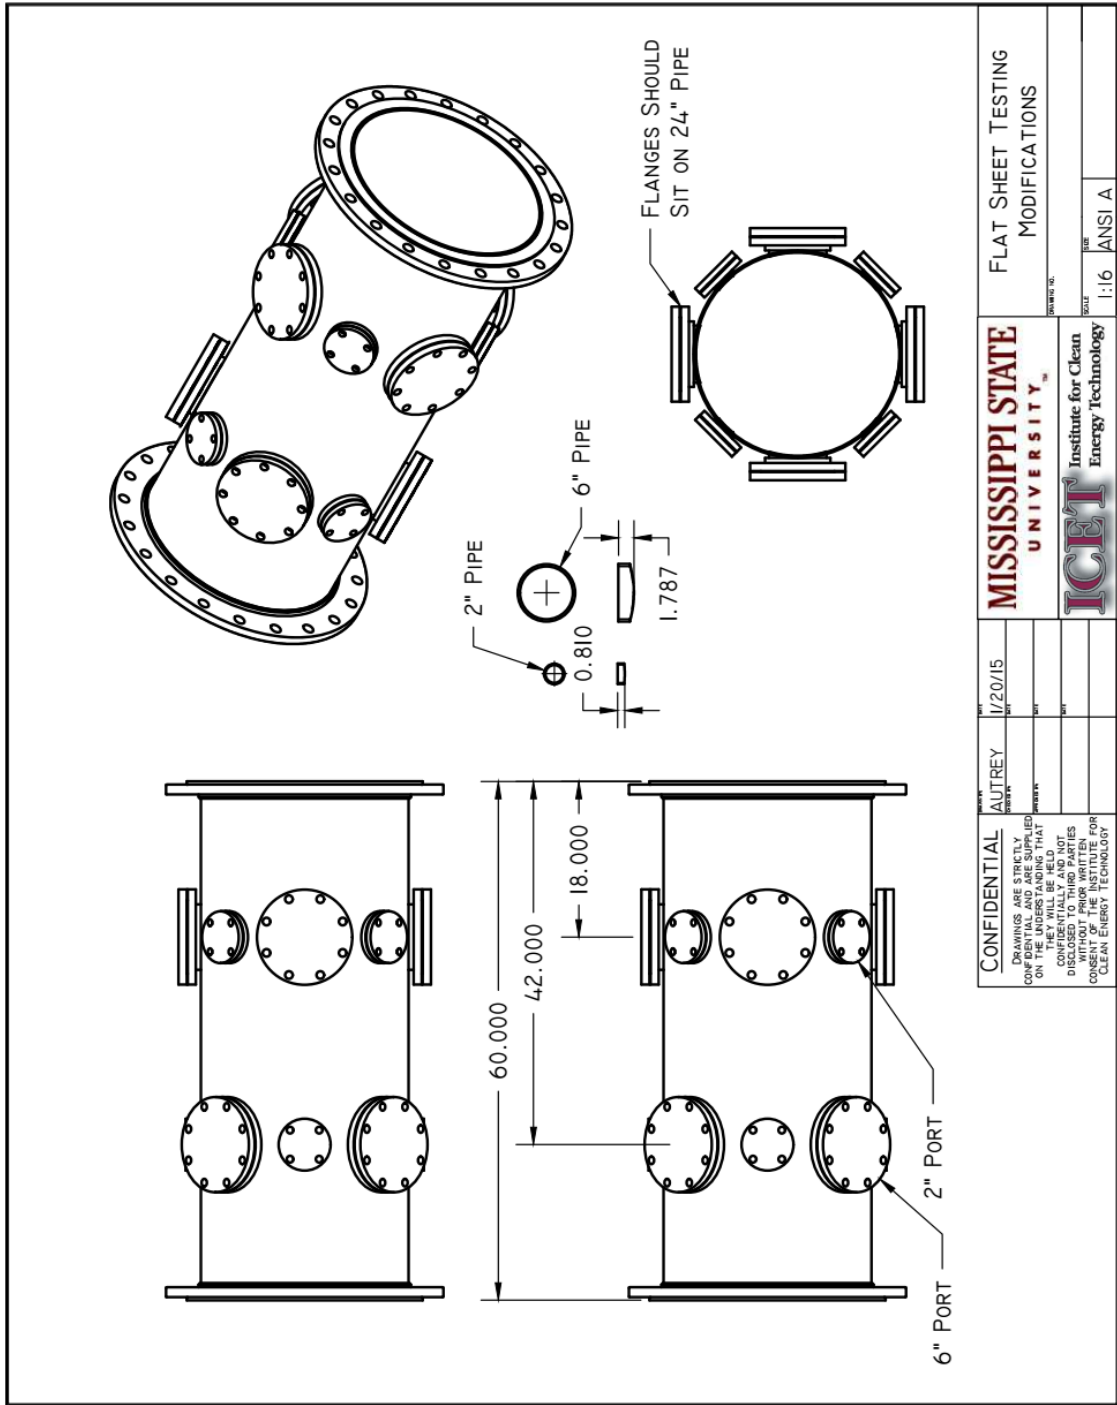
CAD Drawing of the modified test duct section for the isokinetic samplers.
